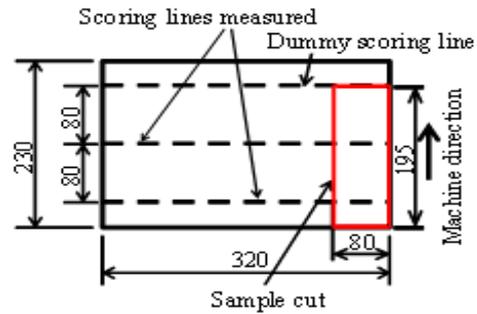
Dimensions of specimen for scoring. Four samples used for folded flap-panel compressive test were cut off from a scored sheet of 320 mm \times 230 mm.
